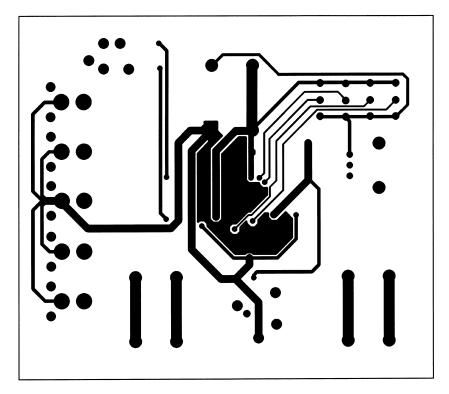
Recommended LQ PC Board Layout: Bottom-Side Layout
